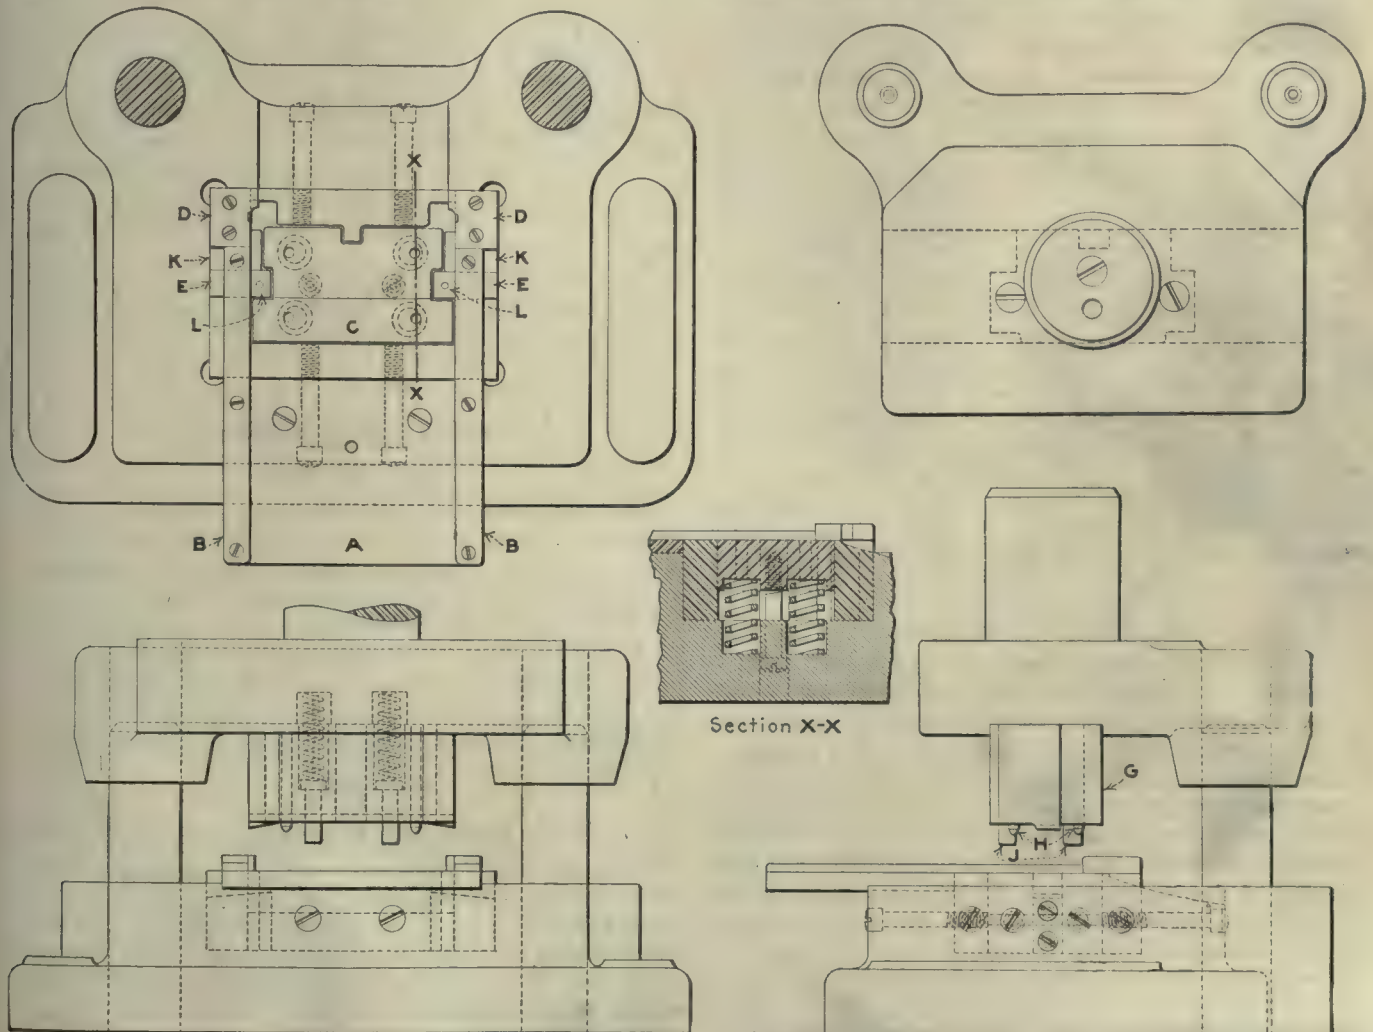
PLAN AND ELEVATION OF FORMING DIE
